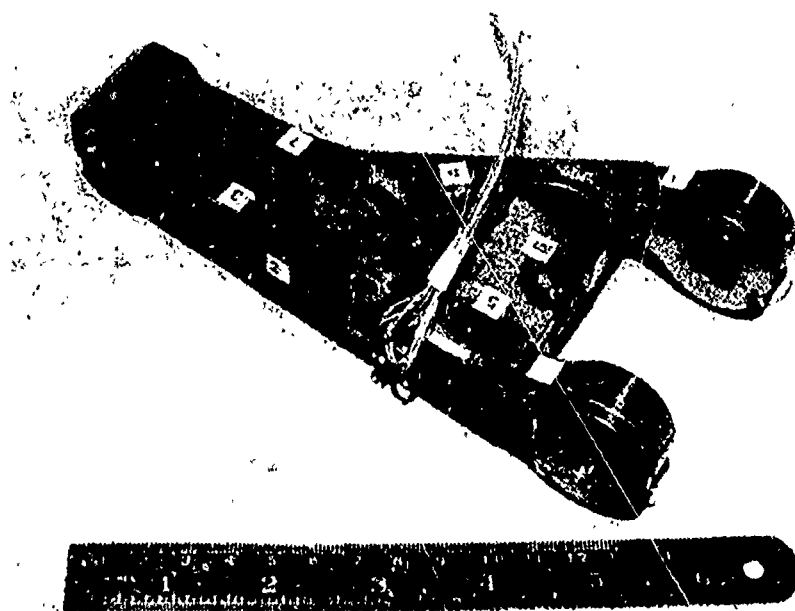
Strain Gaging of BORSIC-Aluminum Torque Arm
